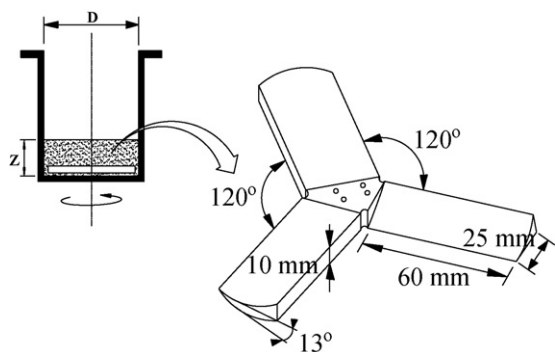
Schematic drawing of the high-shear mixer and the three-bladed impeller.
